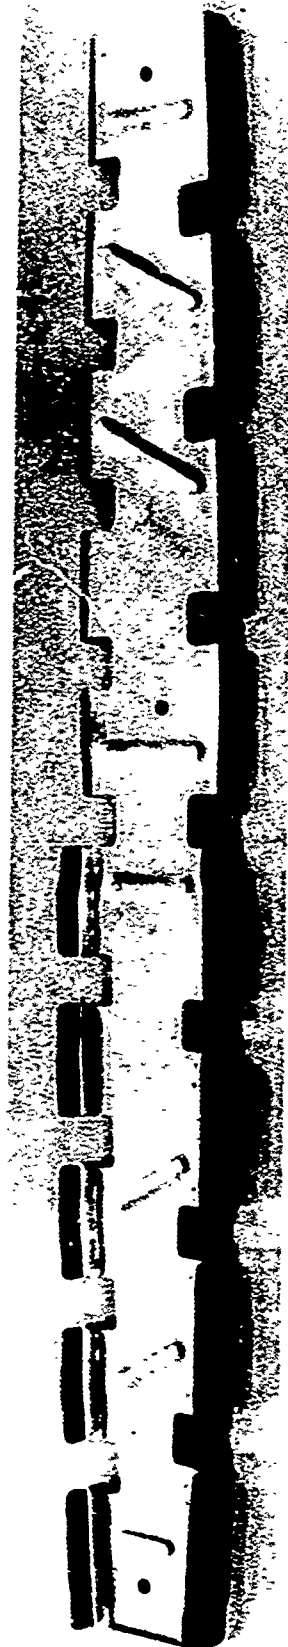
TYPICAL RIB SUBASSEMBLY WITH SHORT-ANGLE STIFFENERS SPOT WELDED TO THE RIB (REF. 85)
